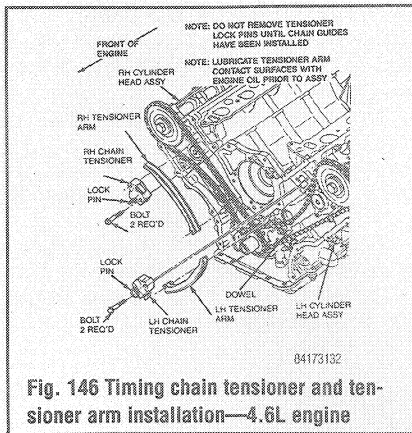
Timing chain tensioner and tensioner arm installation—4.6L engine
